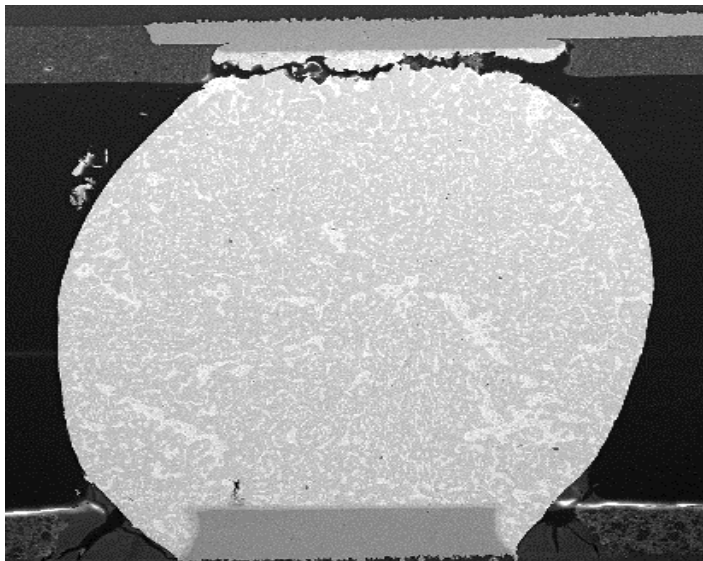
Typical X-Section of a Completely Cracked Solder Joint, C2 BGA after 750 Cycles
